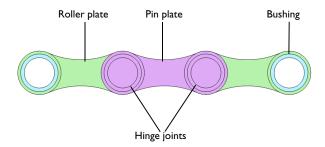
Enlarged view of a chain link. A chain is formed by assembling roller plates and pin plates alternately.
